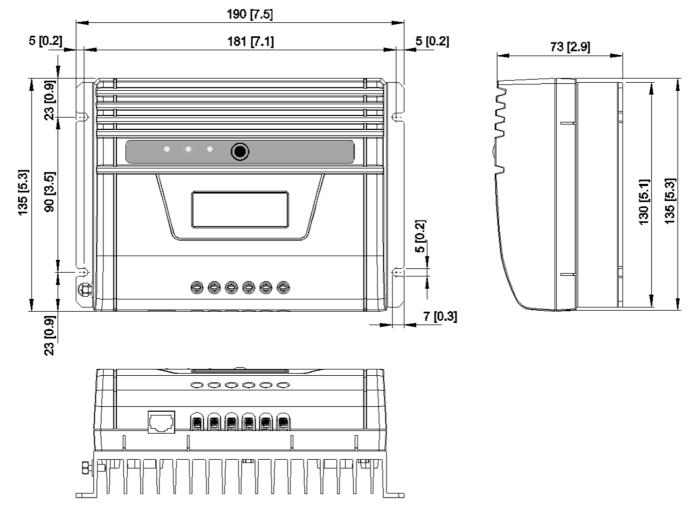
Dimensions of the Solar ChargeMaster in mm [inches]
